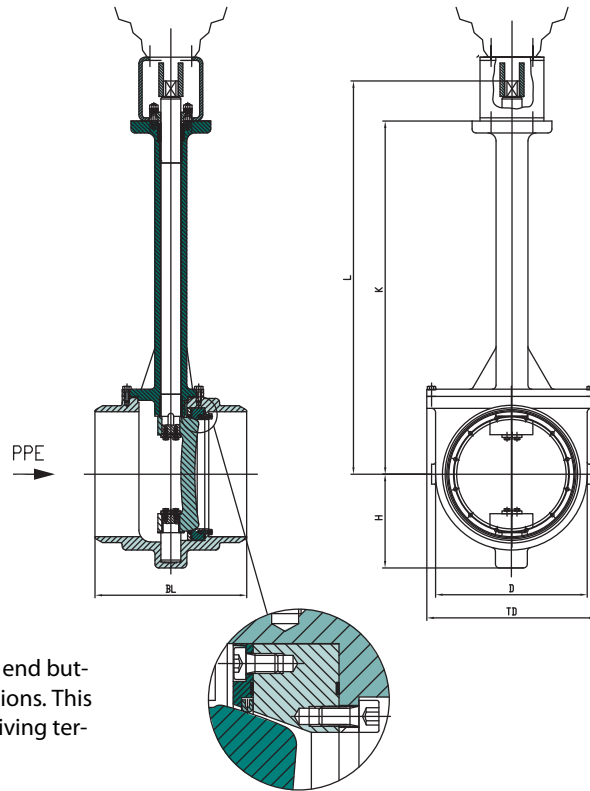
Type K, top entry butt weld end butterfly valve for cryogenic applications. This type is used specially in LNG receiving terminals.
